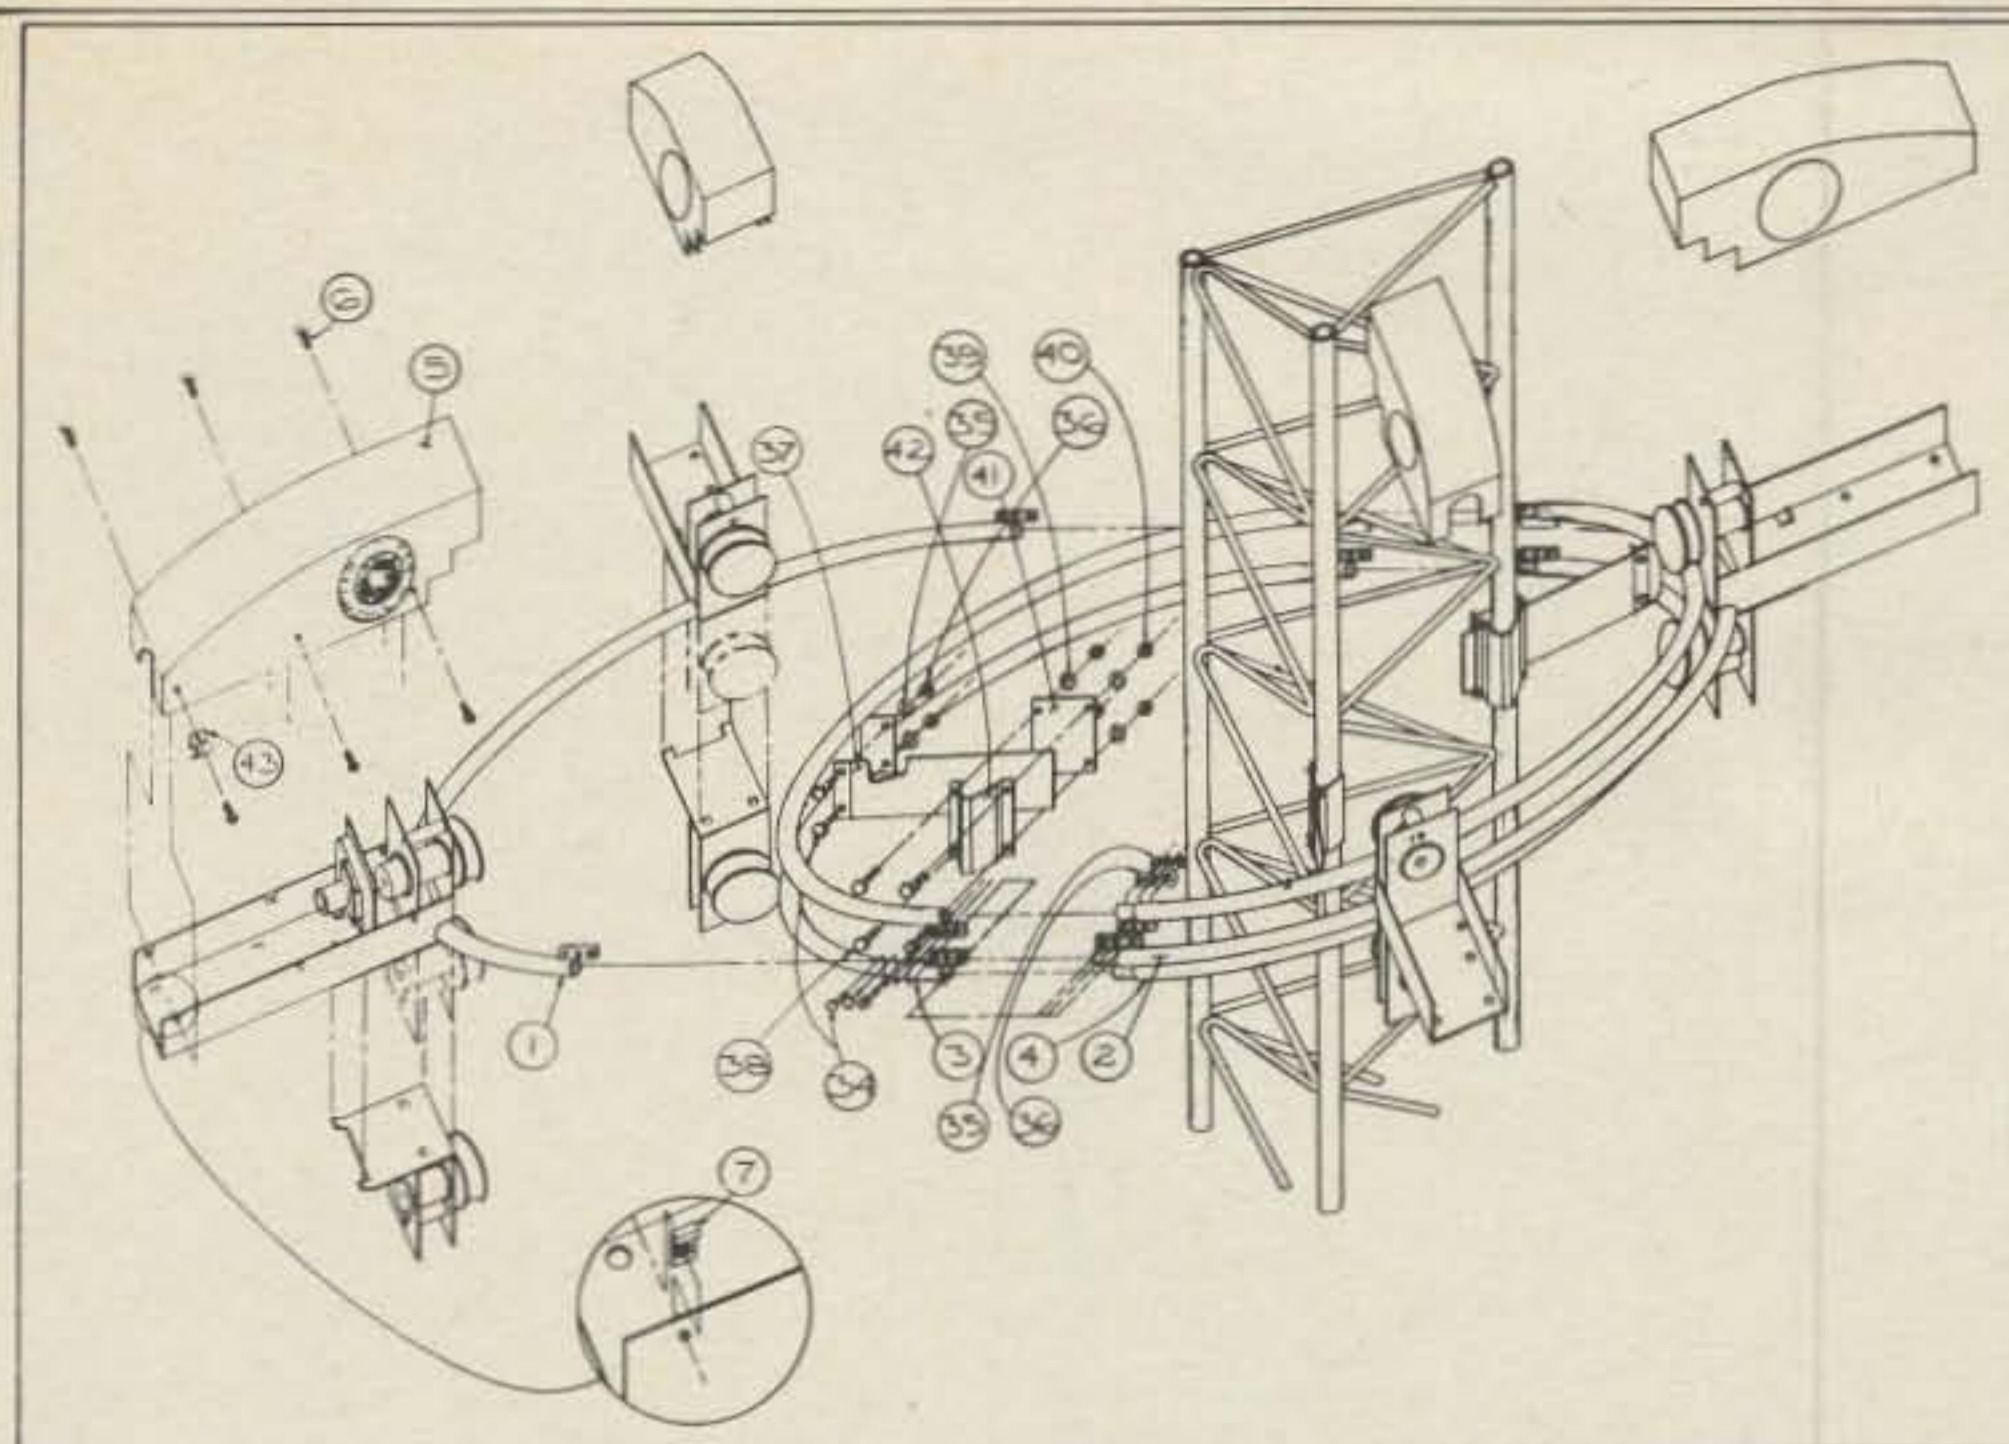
This drawing is an exploded view of the M-1-A rotator.
